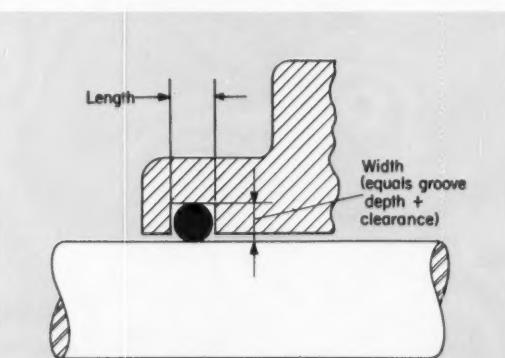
Commonly used definition of O-ring groove dimensions. Width of the groove is its depth plus clearance between shaft and housing. Length of groove is distance between walls.
